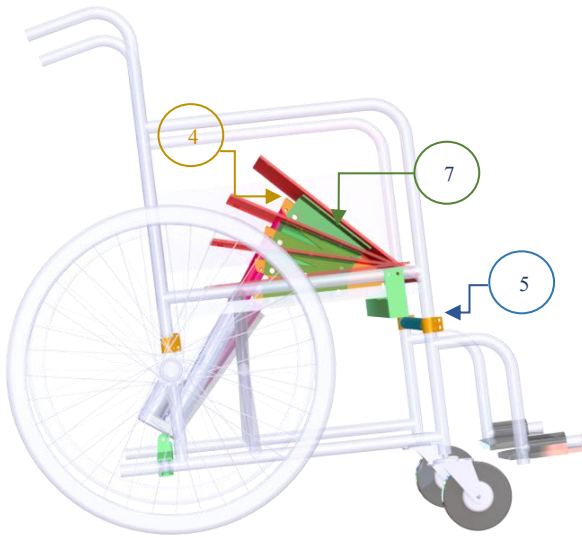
LATERAL VIEW OF ASSEMBLY.
